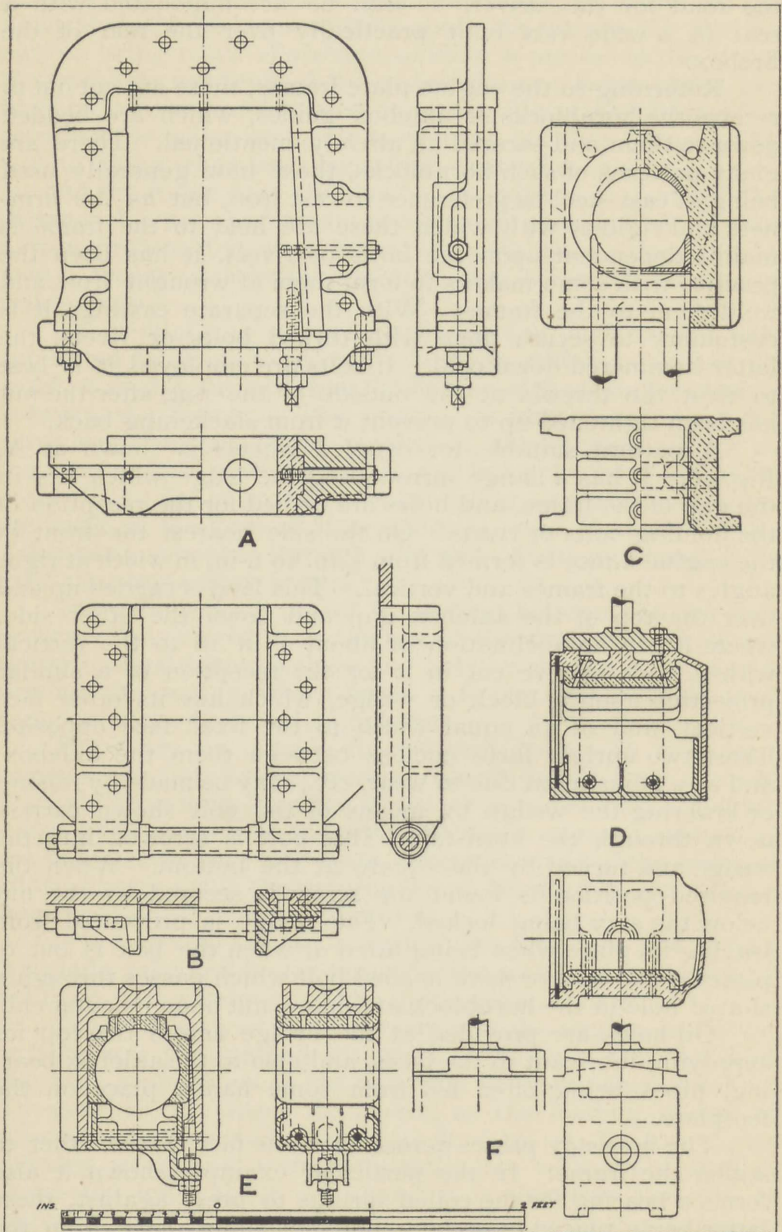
HORNBLOCKS, AXLEBOXES, ETC
